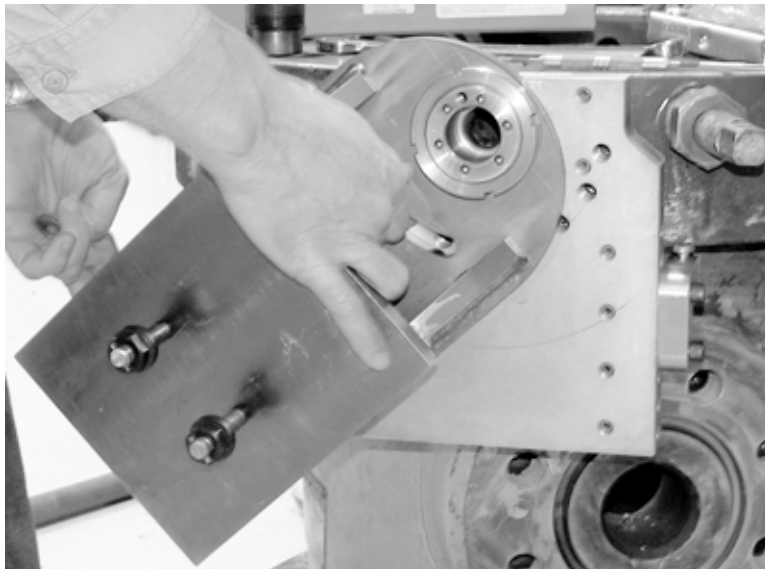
The photo illustrates the Pow-R-Drill mounting base plate (shown without drill). It can be swiveled to mount to any two of the mounting holes.
